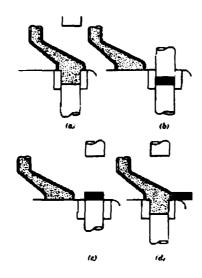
Uniaxial pressure technique in industry [Ref. C1].
